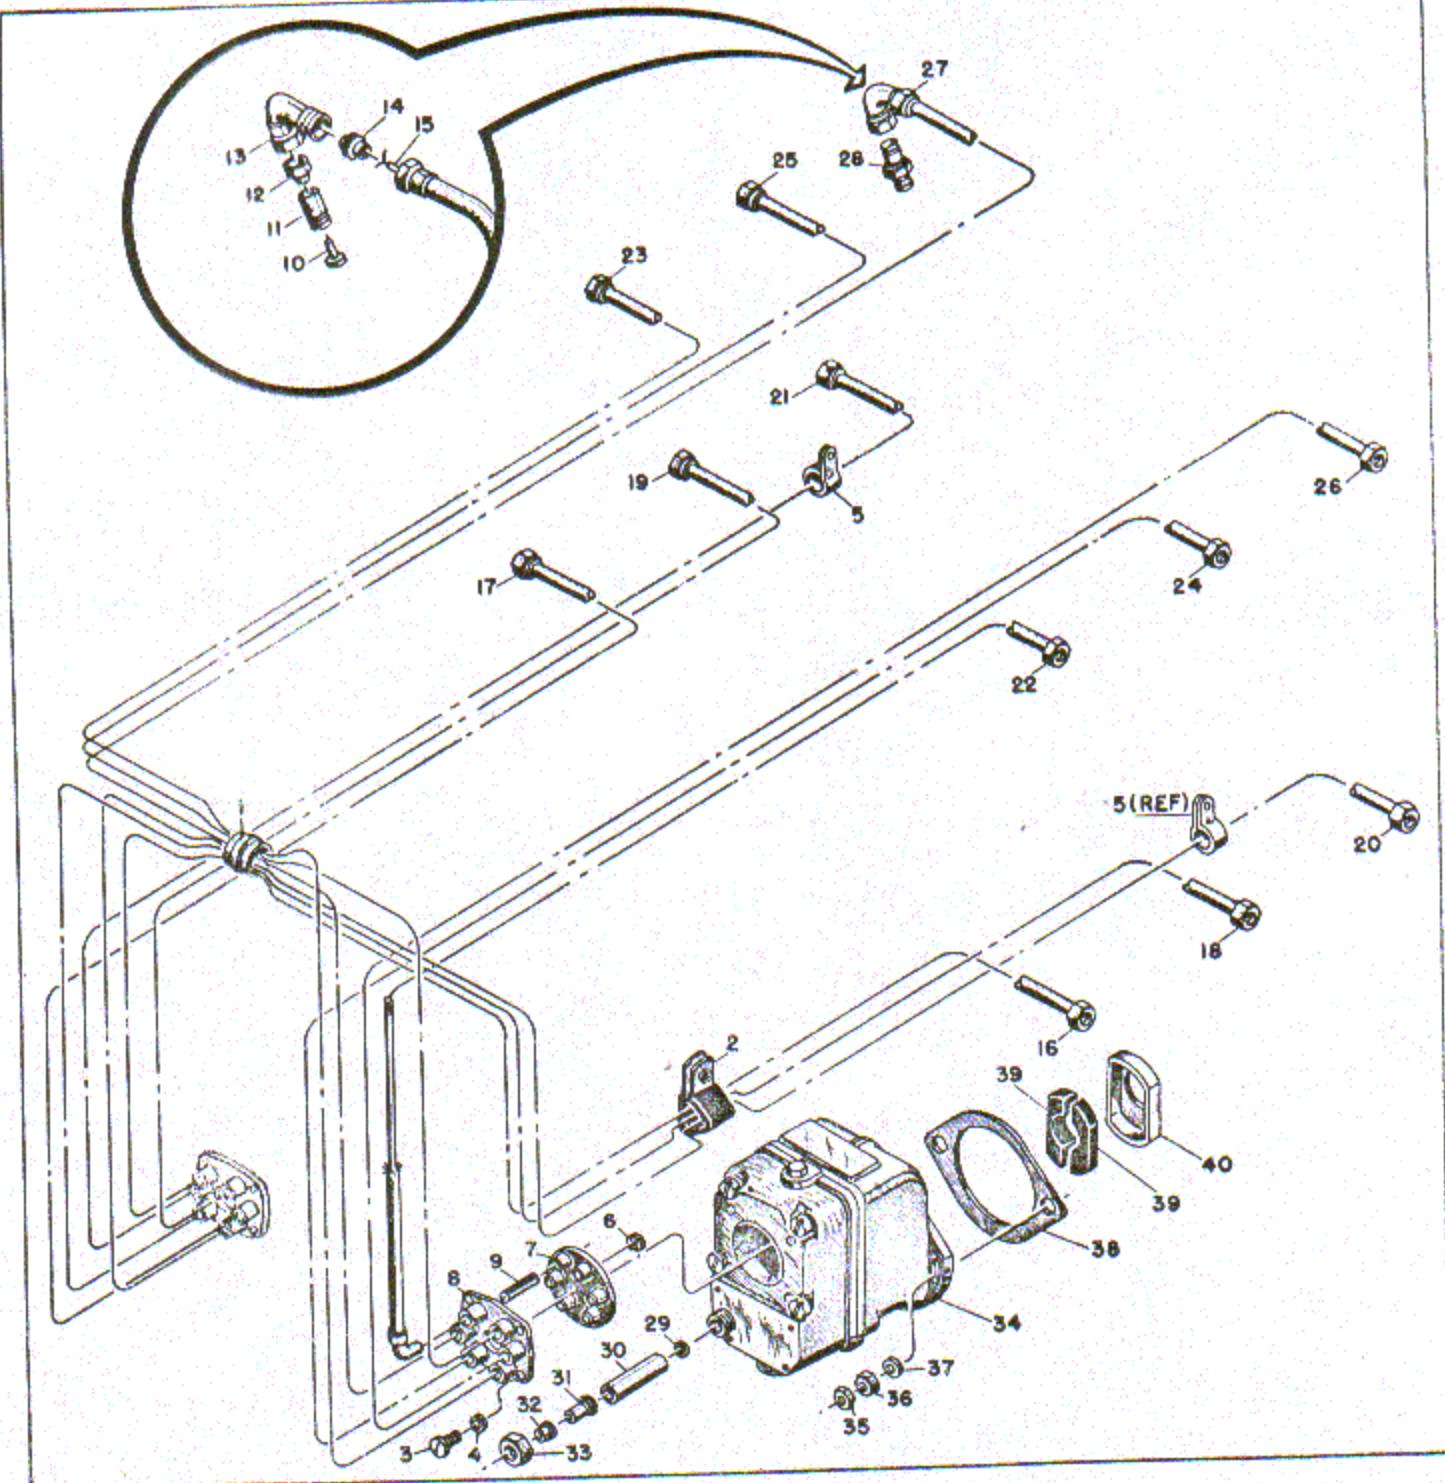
Exploded Parts View of O-470-11 Ignition System (5 mm. cable)
